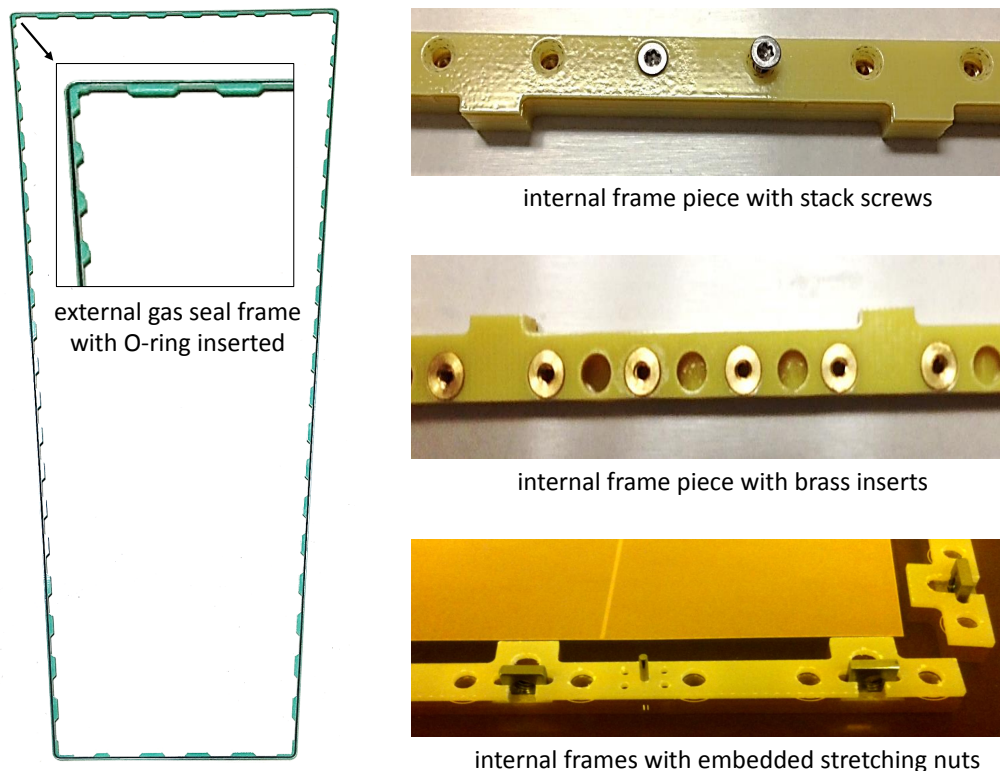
Frames used in the assembly of a CMS triple-GEM module. Left: External gas frame made from a single solid piece of halogen-free glass epoxy (ISOLA DE156) with O-ring inserted. Right: Section of the internal frame of a GEM stack with stainless steel screws and counterbores on one side (top) and embedded counteracting brass nuts on the other (center). The shiny frame surface (top) is due to its coating with Nuvovern polyurethane varnish to prevent fiberglass dust. Square nuts are embedded in the tabs on the frame (bottom) for tensioning the GEM stack against pull-outs with tensioning screws.
